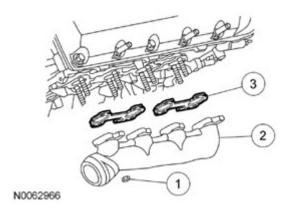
Identifying RH Exhaust Manifold, RH Exhaust Manifold Gaskets And Nut Courtesy of FORD MOTOR CO.
